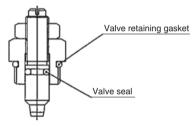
Positions of valve seal and valve retaining gasket 3-5. Lock piston seal (End lock section)
